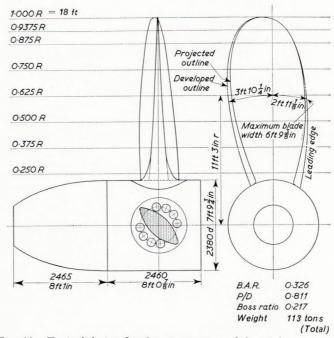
Typical design for the wing screws of the triple arrangement for the one million ton tanker
